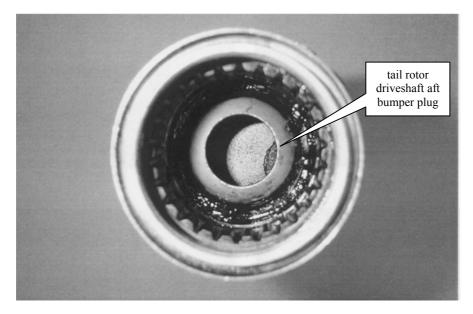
End view of tail rotor driveshaft showing the hole in the bumper plug
